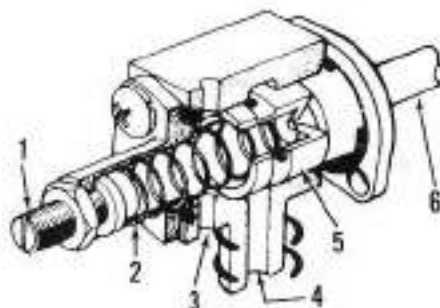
A—Cross-section of sequence valve. Valves are alike but are adjusted to different settings.
